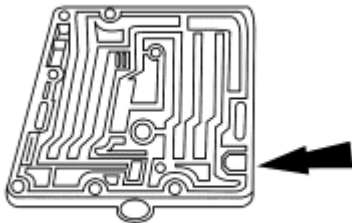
Identifying Transfer Plate Main Control Valve Body Parts
